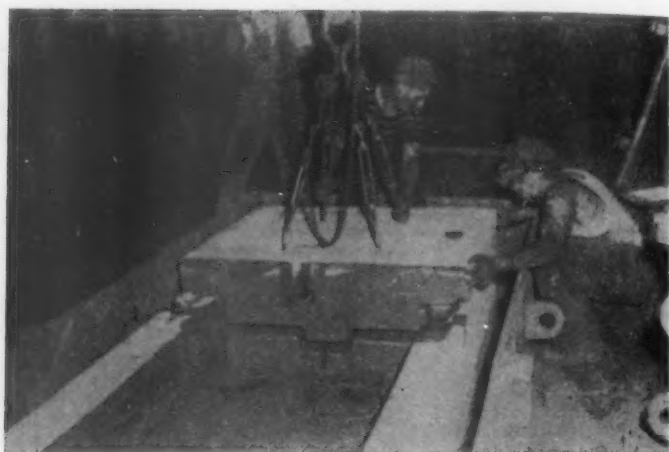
LATHE BED PAN COVER MADE WITH CEMENT CORES.
